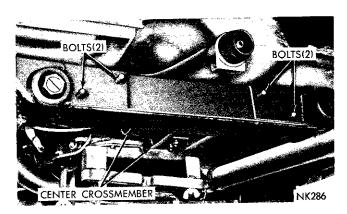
Removing or Installing Center Crossmember (Auto. Trans. Shown)
